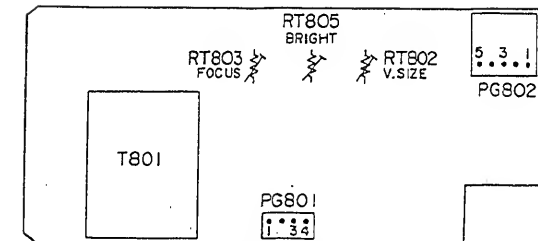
Electronic Viewfinder Circuit Board (Components Side)
